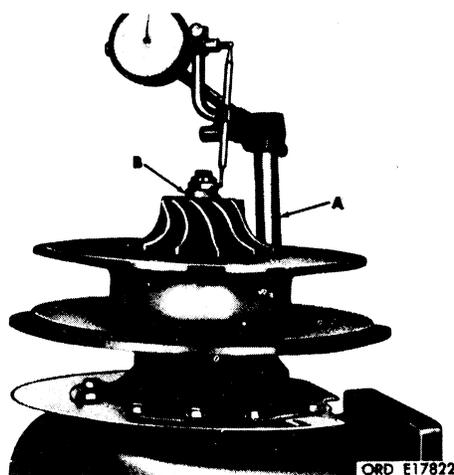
CHECKING COMPRESSOR WHEEL TOTAL RADIAL MOVEMENT.
